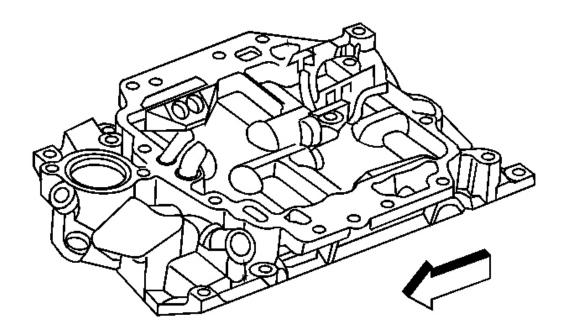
Lower Intake Manifold Courtesy of GENERAL MOTORS CORP.
